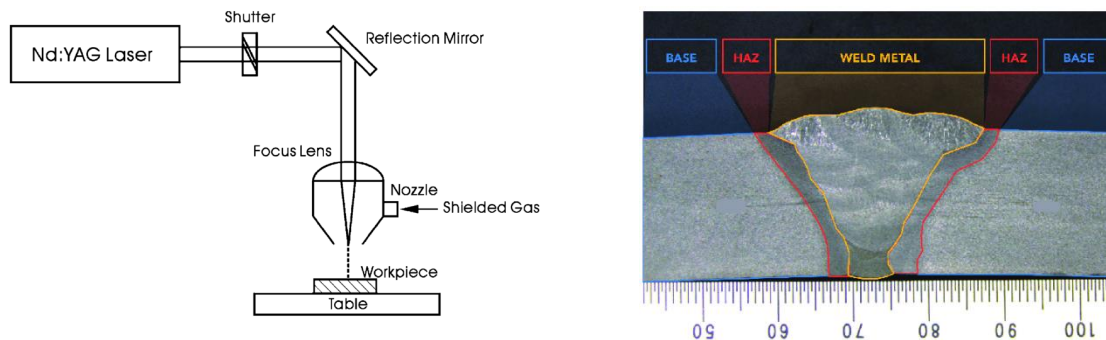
(a) Schematic of laser welding. (b) The image of the boiling pool
